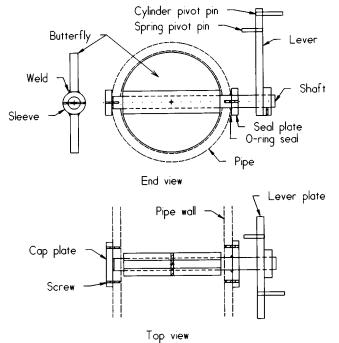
Design details of butterfly valve, shaft, and lever plate.
